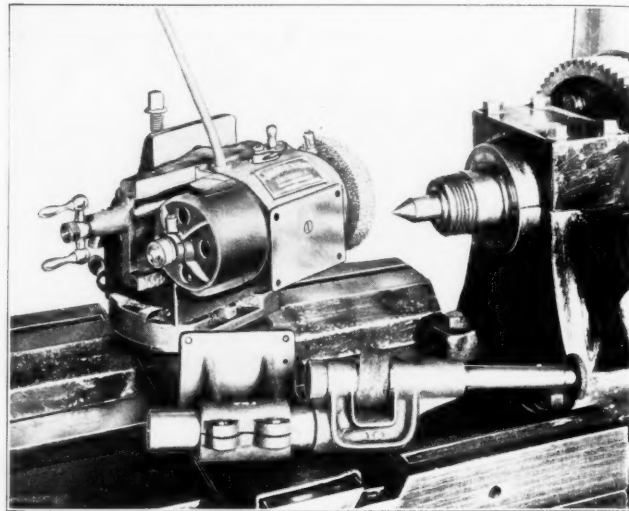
Electric Grinding Attachment Mounted on Compound Rest Swivel of Lathe
